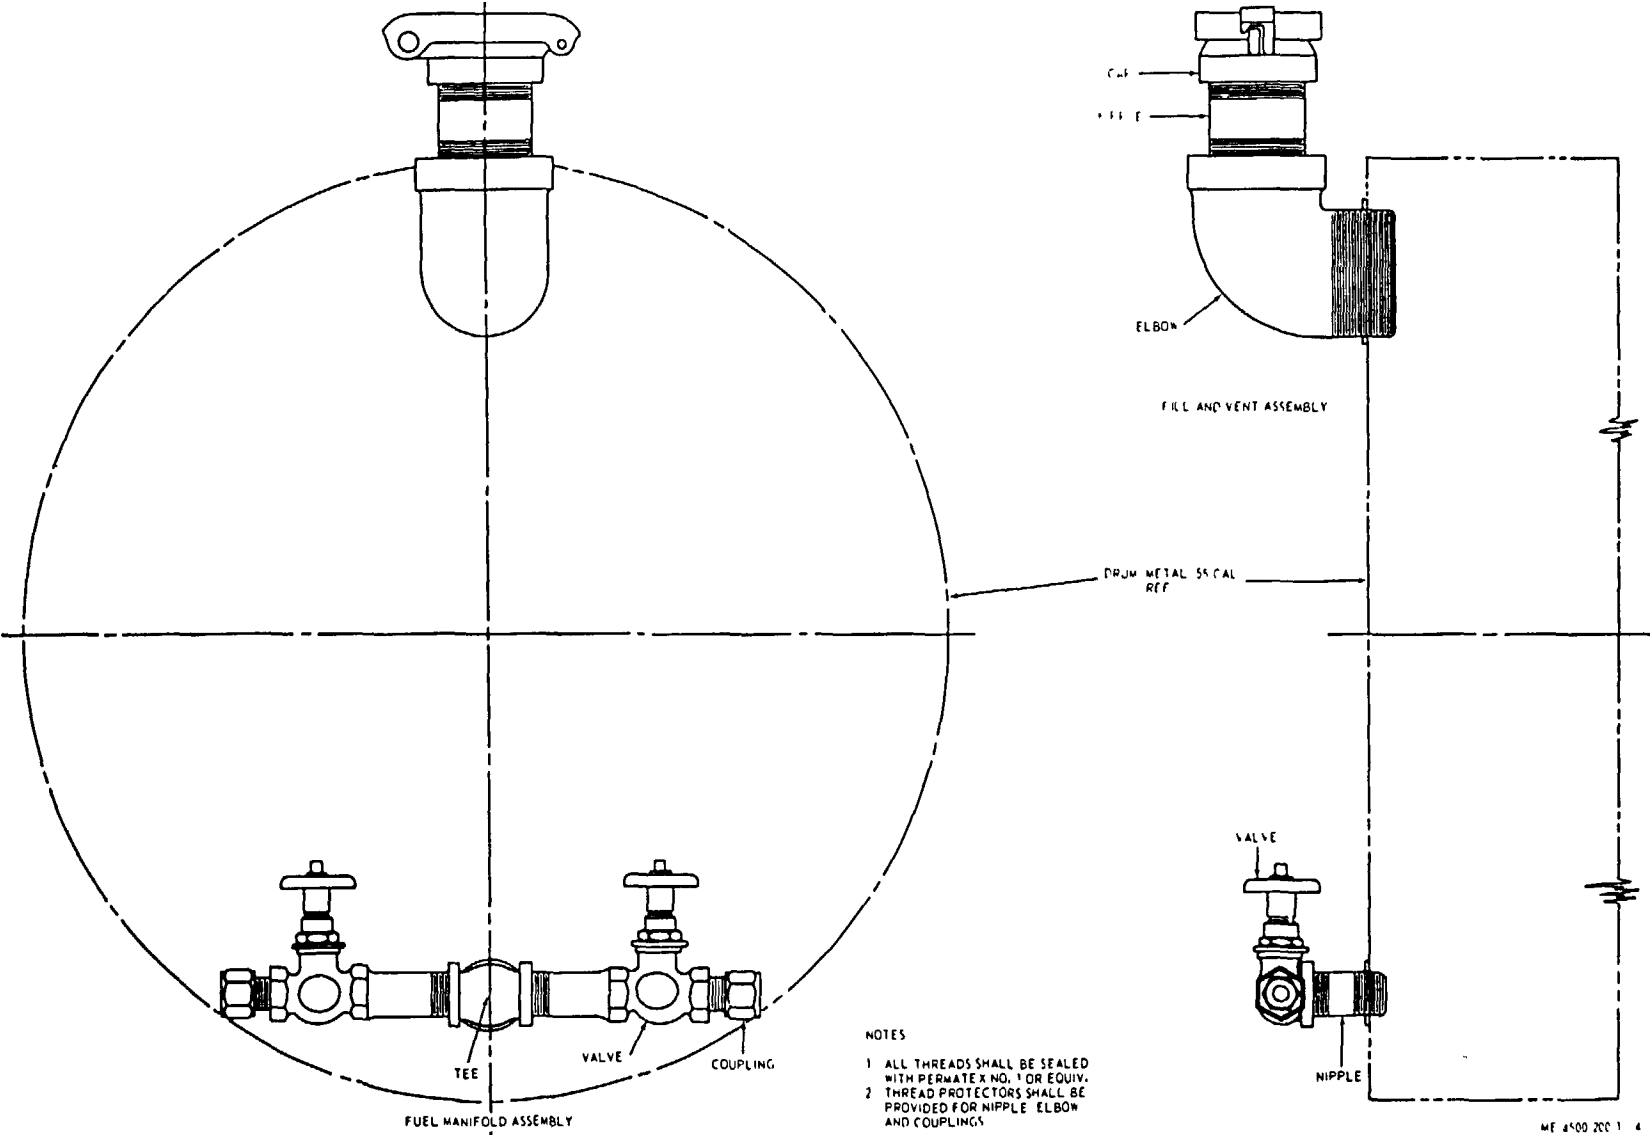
Fill and vent assembly and manifold assembly, assembled and installed
